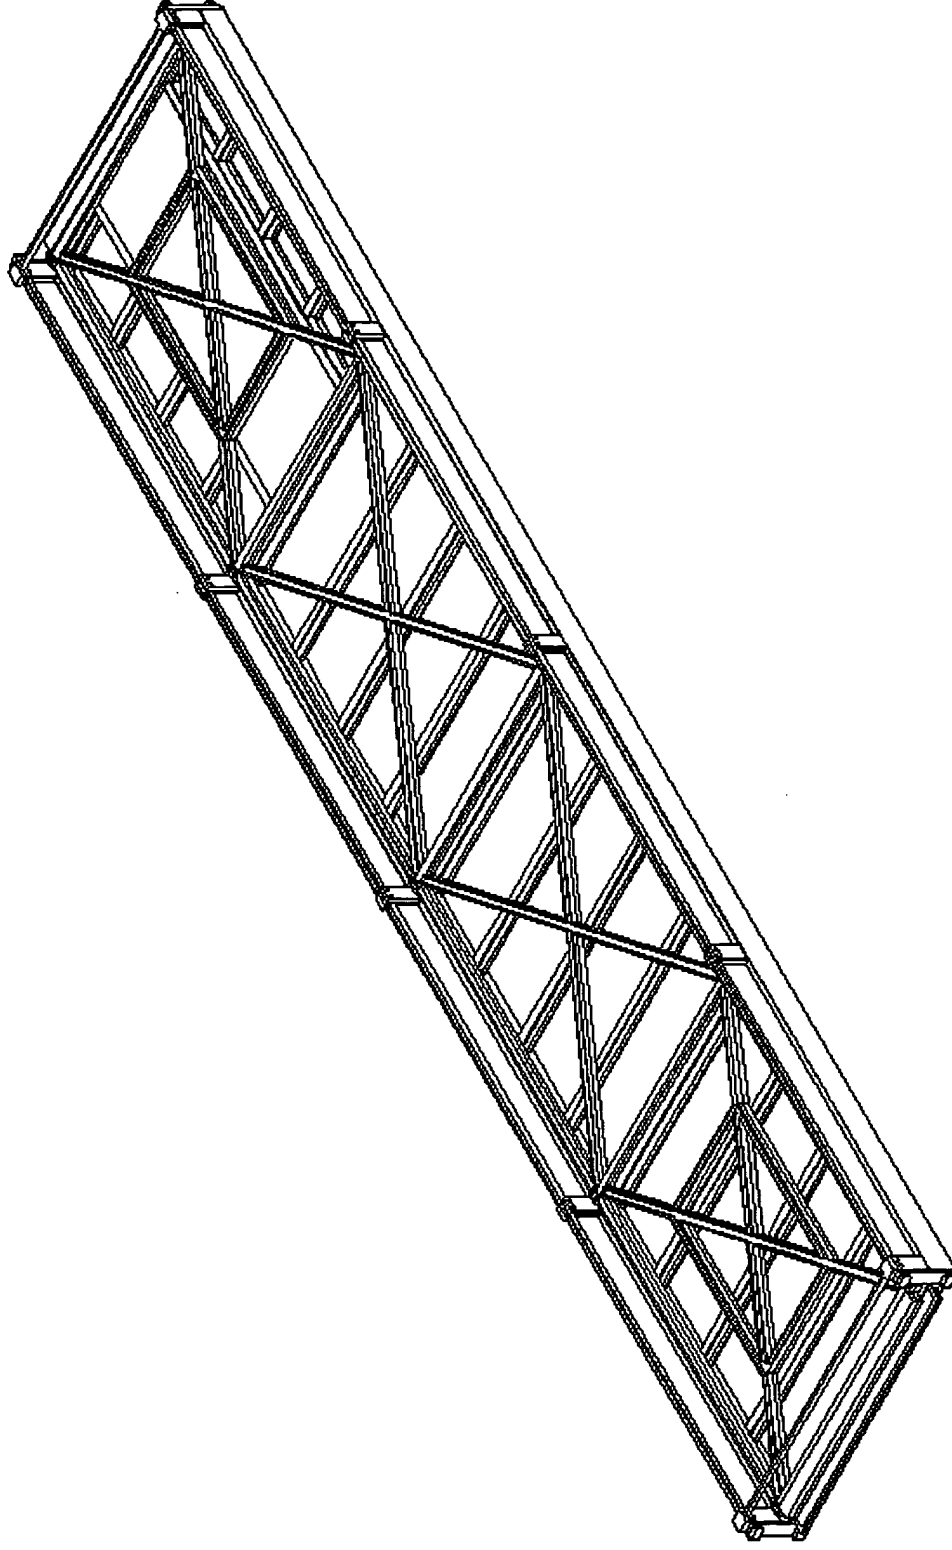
B: Step1 of disassemble and load process: The front and back frames of the shipping collapsible cargo container are stored in its own floor frame, and a base part is placed at each end. This 40 foot high cube shipping collapsible cargo container floor frame panel is now referred as "shipping floor frame panel".
